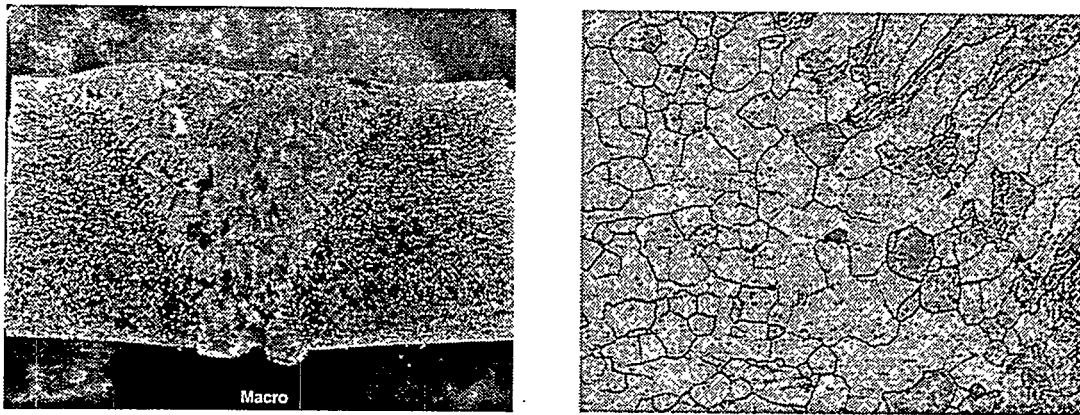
Multipass Gas Tungsten Arc Weld in 12.7-mm Thick Alloy FA-129 Plate
